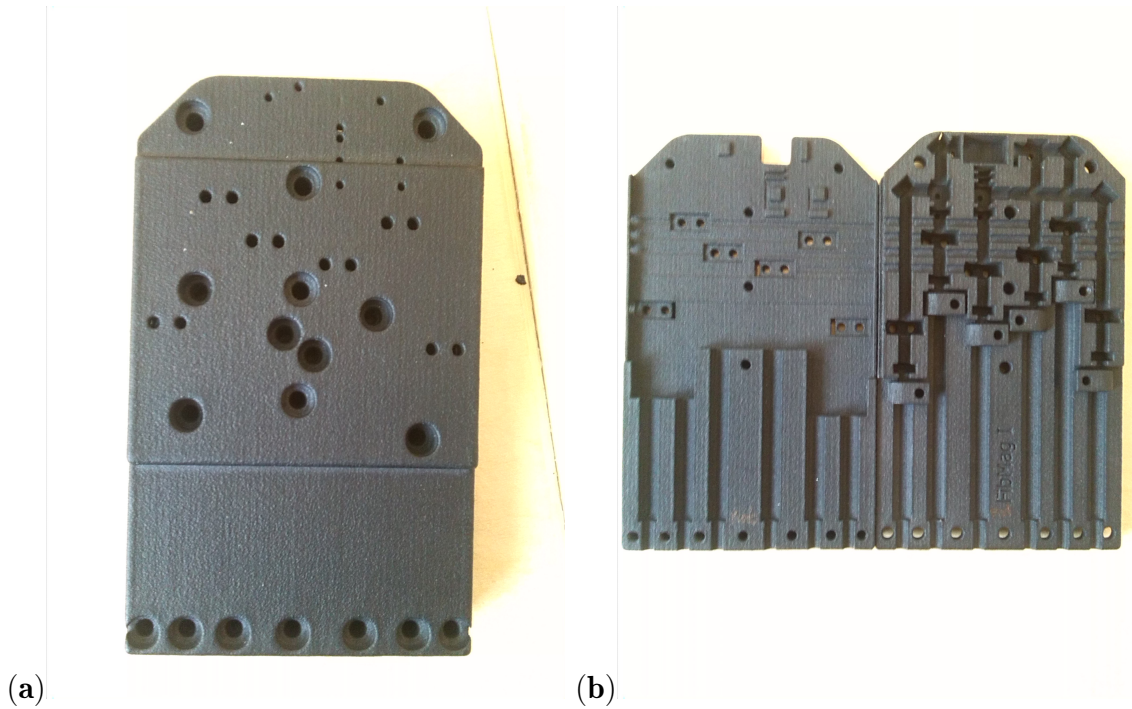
(a) Outside view of bottom of the magnetometer (b) Inside view of both parts of the magnetometer
